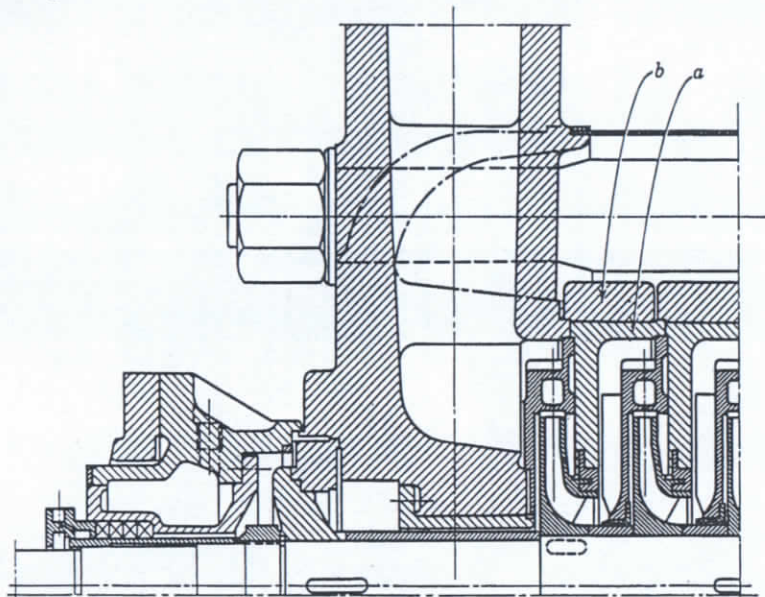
Detail of high pressure Klein, Schanzlin & Becker boiler feed pump.
